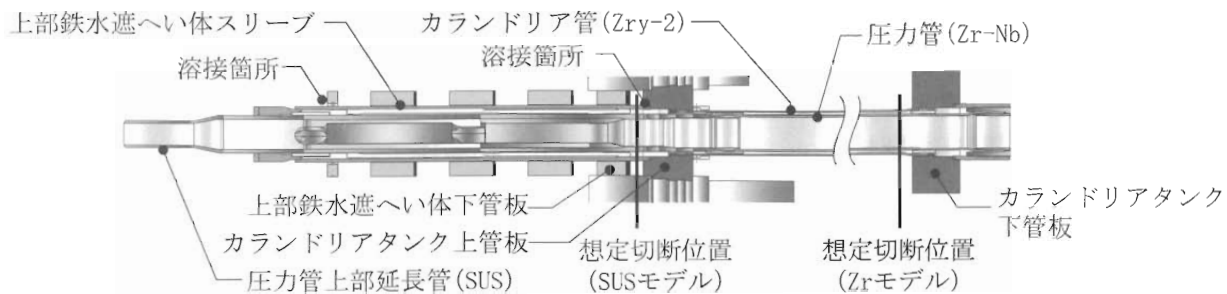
The assumed in-tube Cutting Parts of Pressure Tube Assembly
